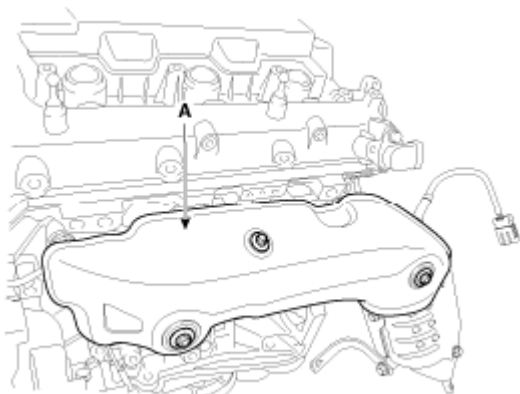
Identifying LH Exhaust Manifold Heat Protector
